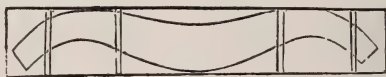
SIDE SHAPE FOR OX YOKE.
